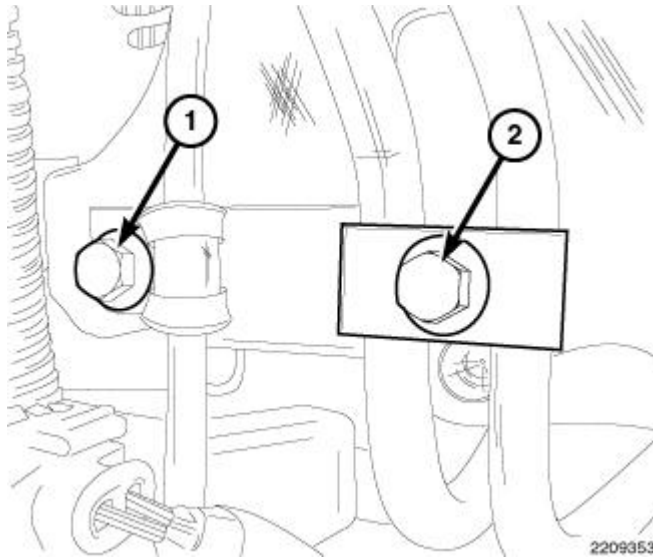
Fuel Feed & Return Line Bracket Bolt With High Pressure Fuel Feed Line To Fuel Rail Bolt
